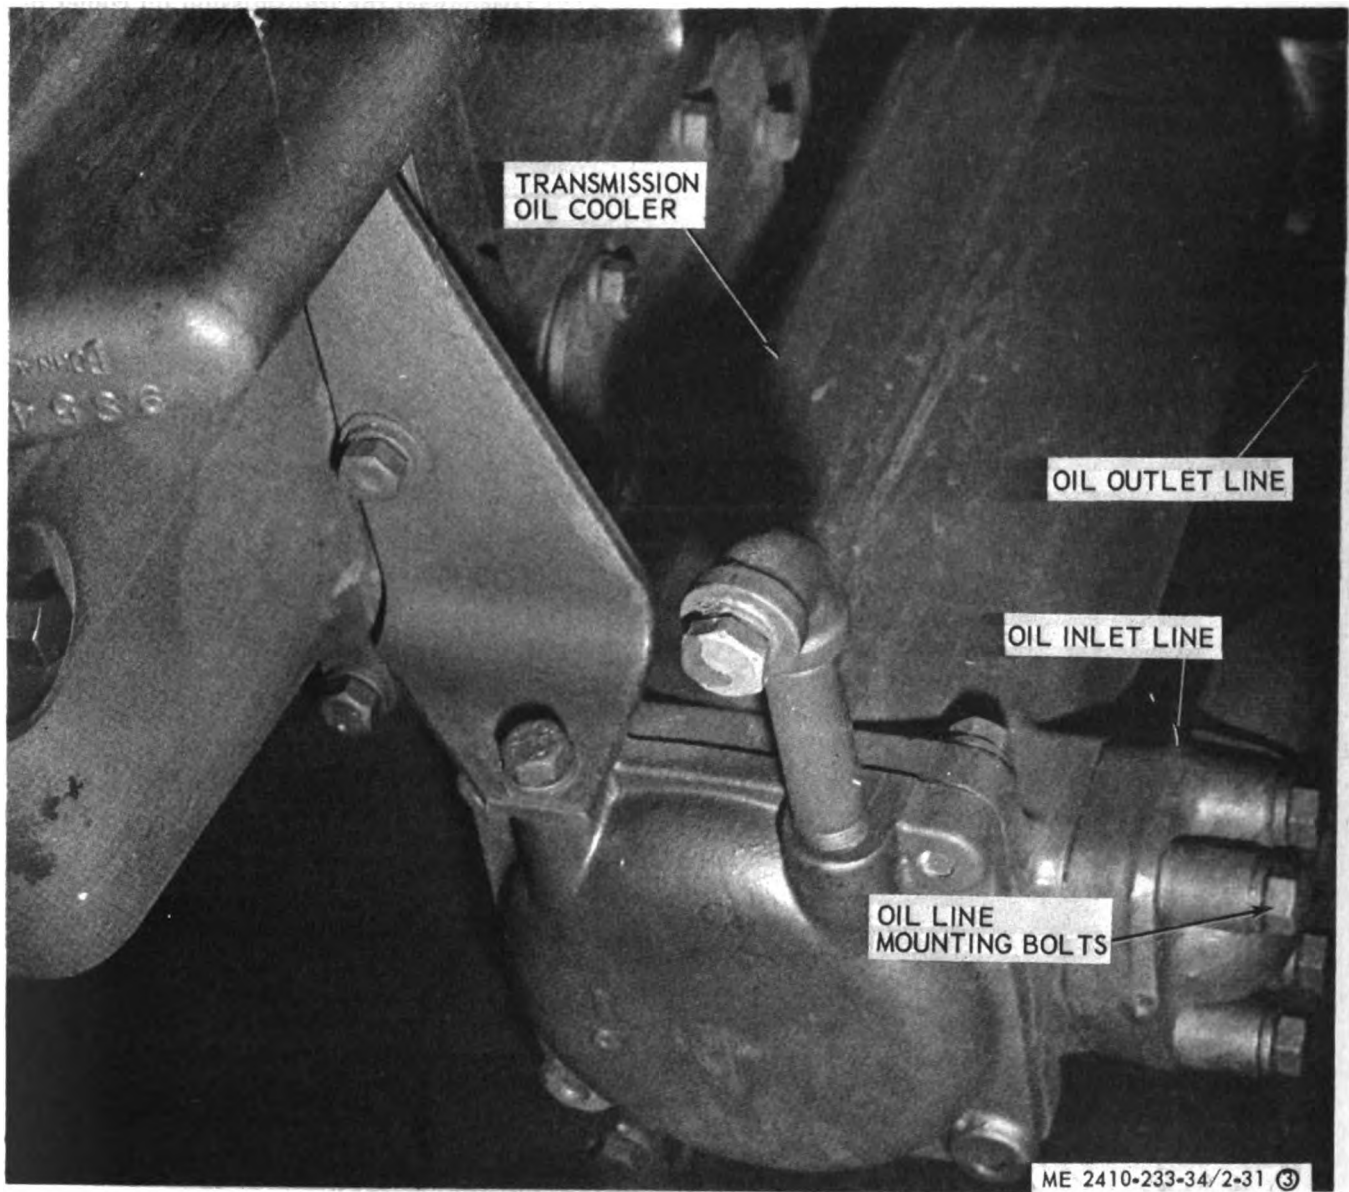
Preparing to remove engine (sheet 3 of 6).
